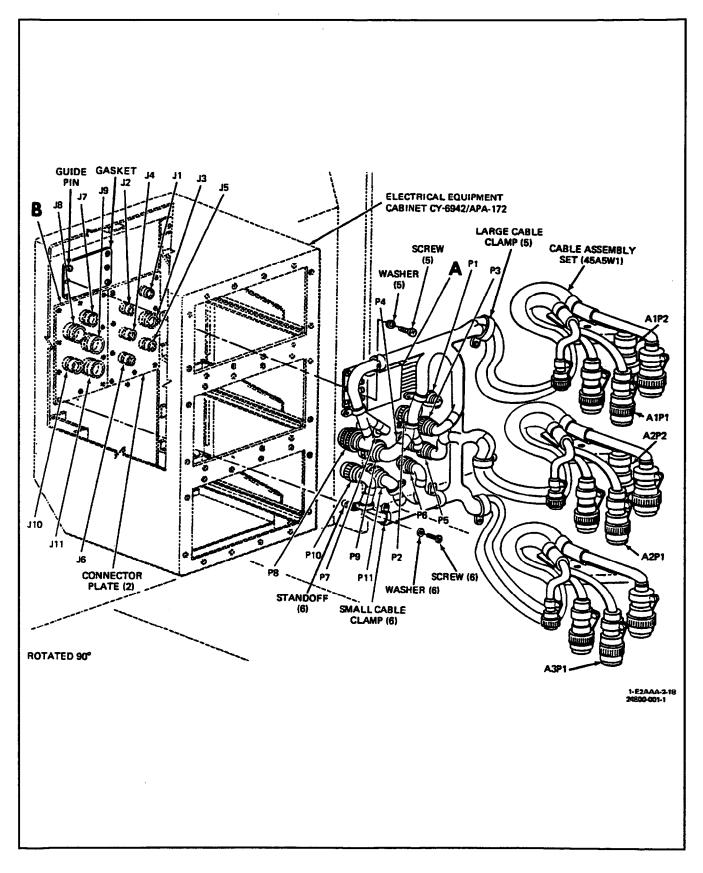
Removal and Installation of Cable Assembly Set and RFI Filter (Sheet 1 of 2)
